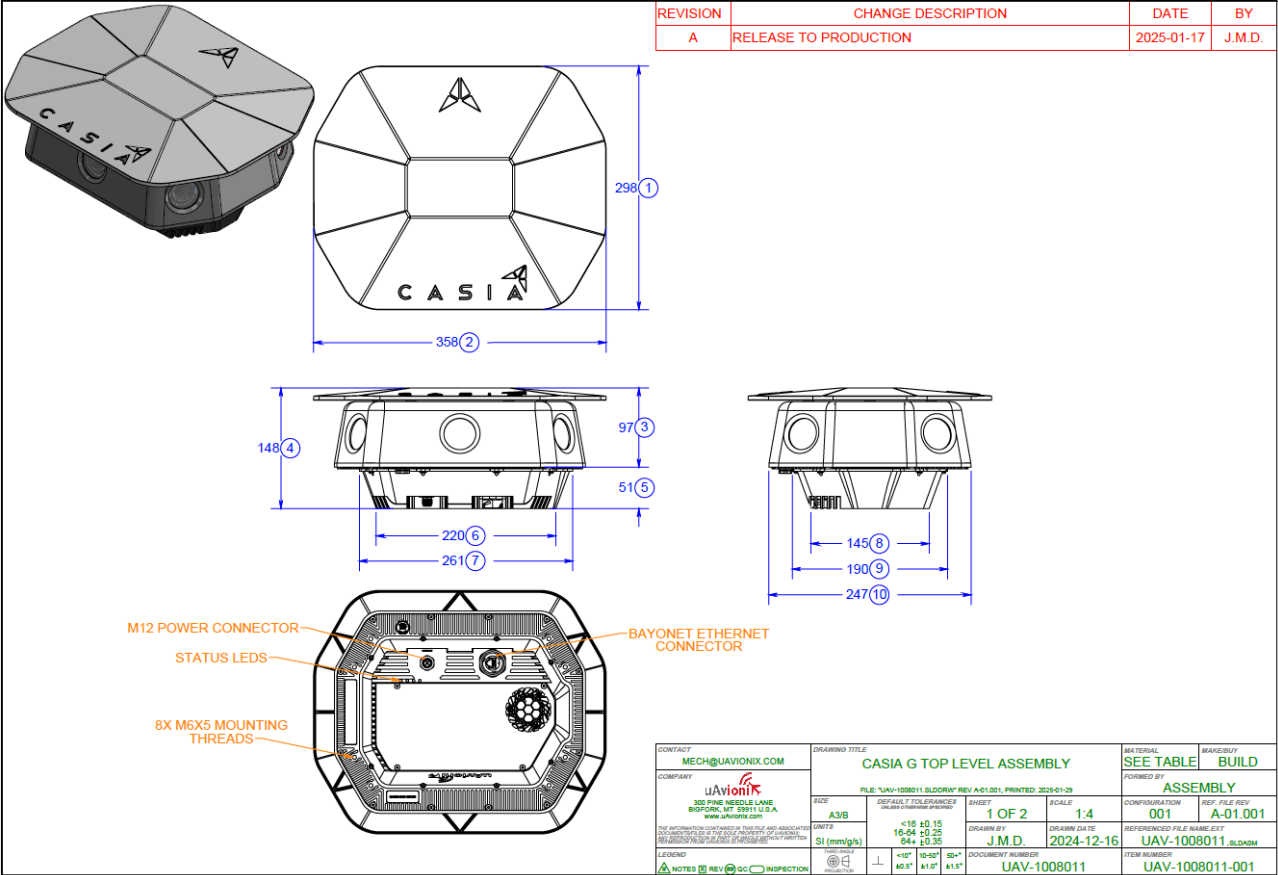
Casia G Top Level Assembly Mechanical Drawings
